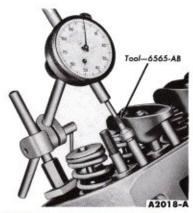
Camshaft Lobe Lift— 260 and 289 V-8
